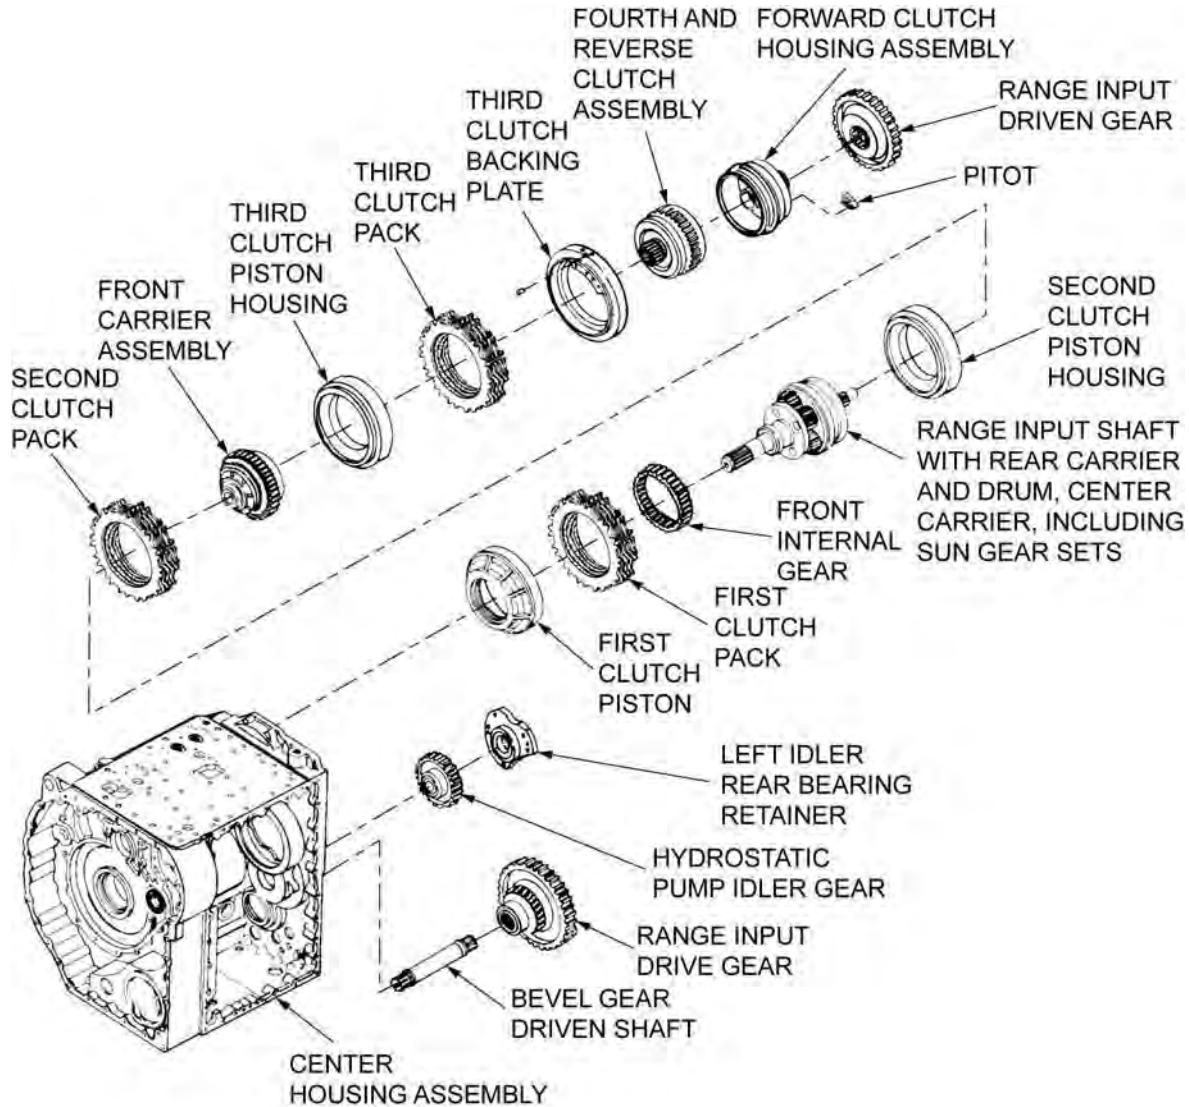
Exploded View of Major Components, Left Side of Center Housing Assembly.
